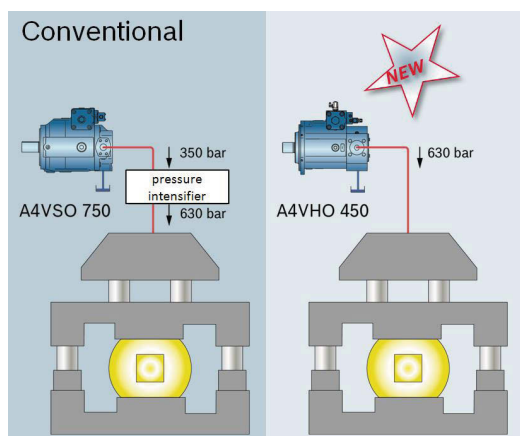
Reduced installation equipment in steel plants with A4VHO450
